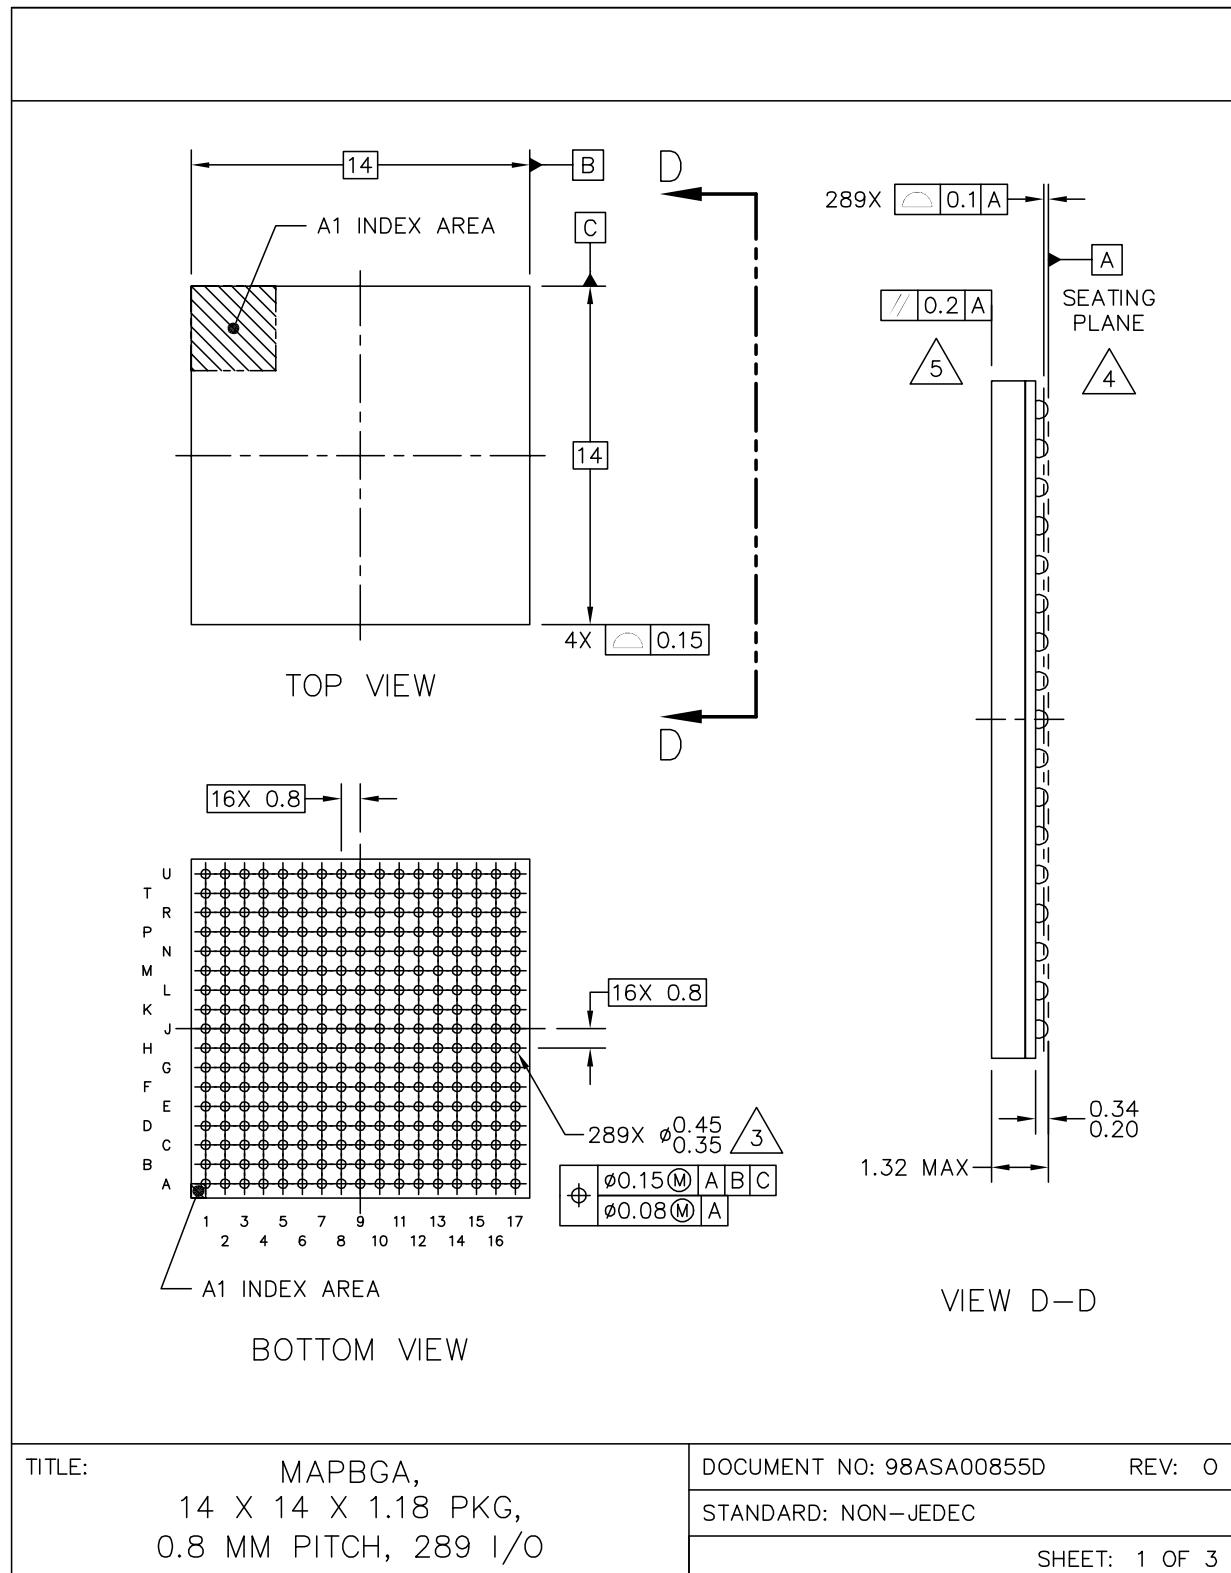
14 x 14 mm BGA, Case x Package Top, Bottom, and Side Views
